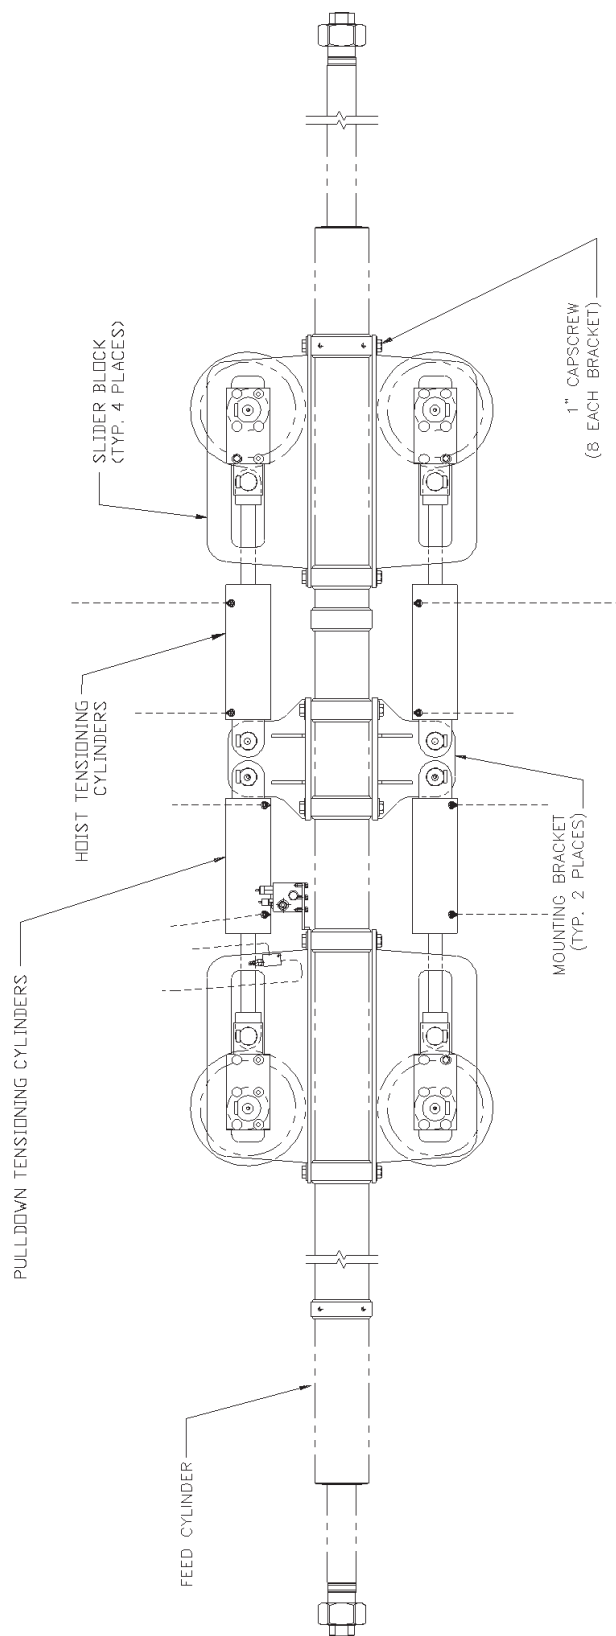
Cable Tensioning Assembly (ref. 416114)
